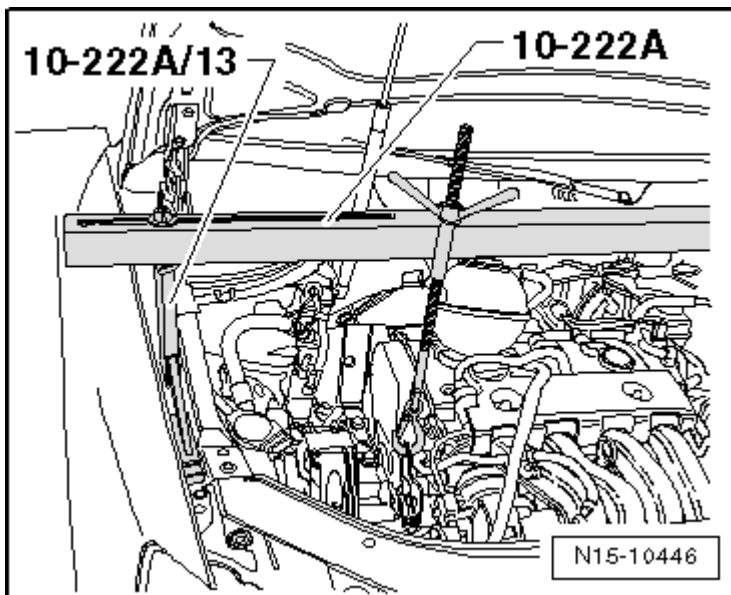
Identifying Engine Support Bridge -10-222 A- And Special Tools
